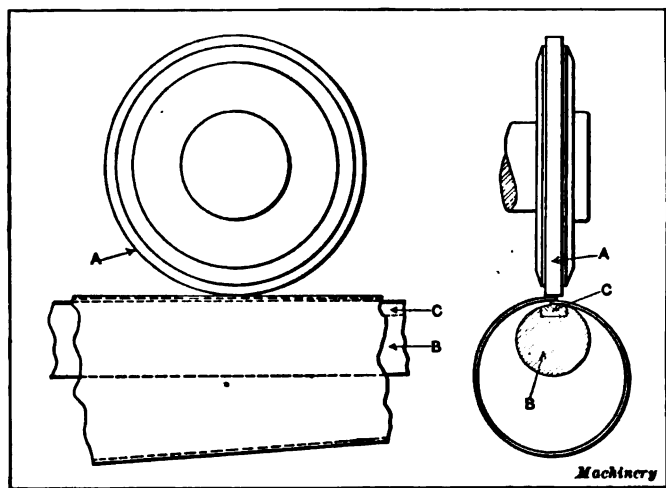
Diagram illustrating Method of lap-welding Coffee Pots on Machine shown in Fig. 9
